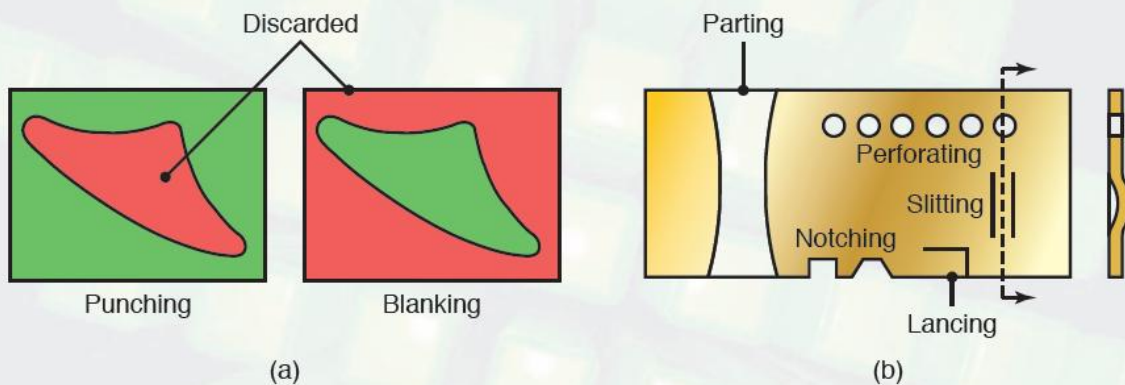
(a) Punching and blanking. (b) Examples of shearing operations on sheet metal.
